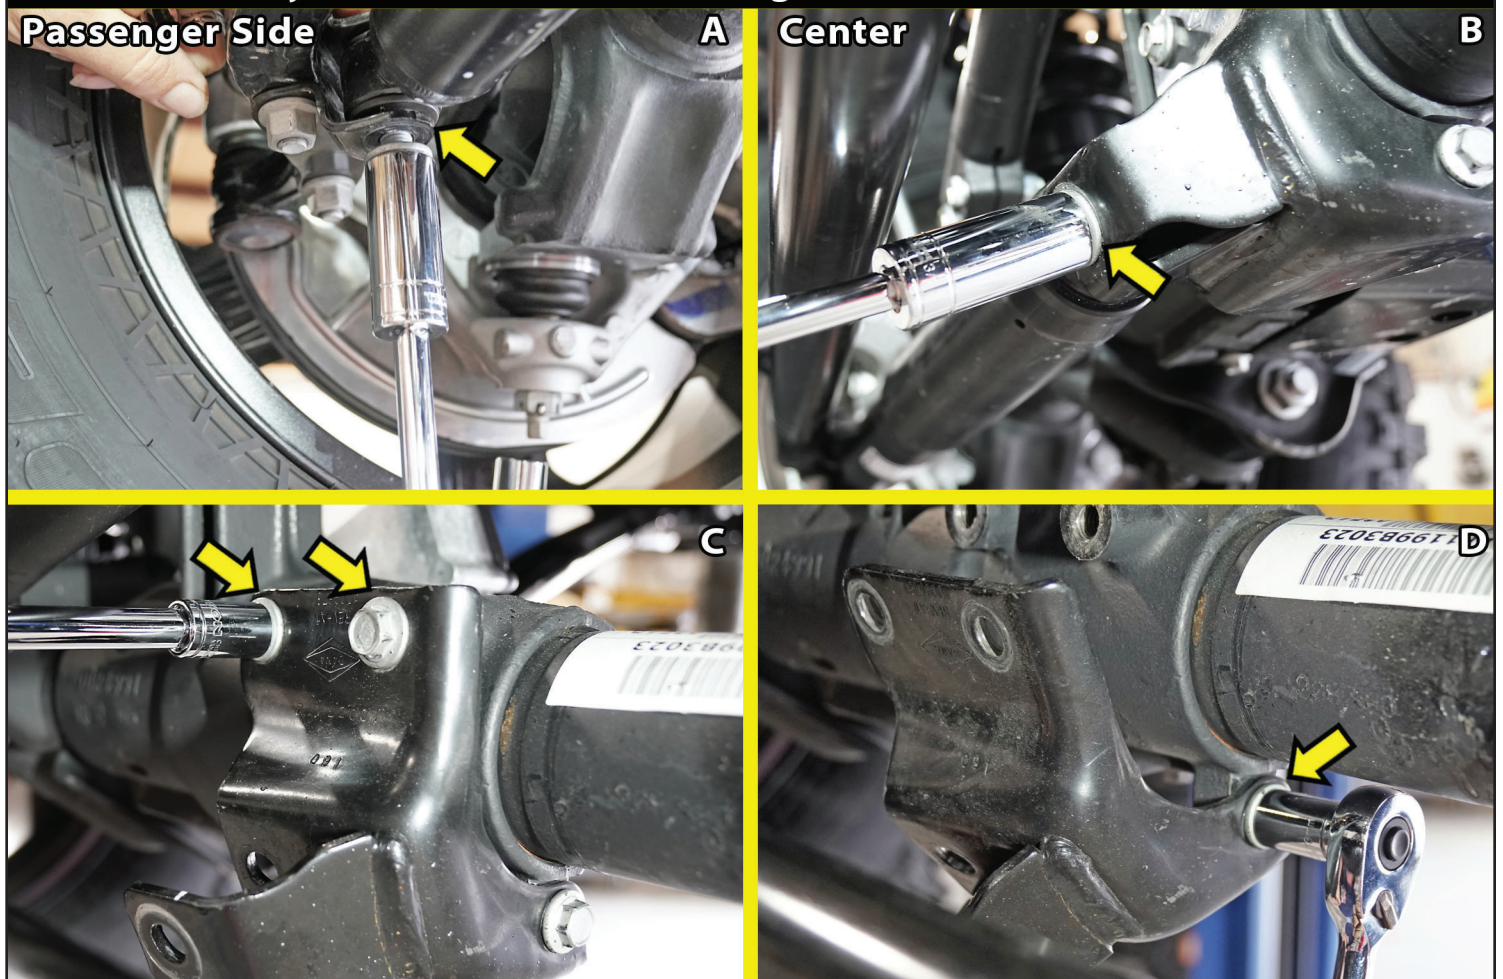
B] Remove the stabilizer mounting bolt from the factory bracket at the center axle. [18mm] Remove the factory steering stabilizer cylinder..
